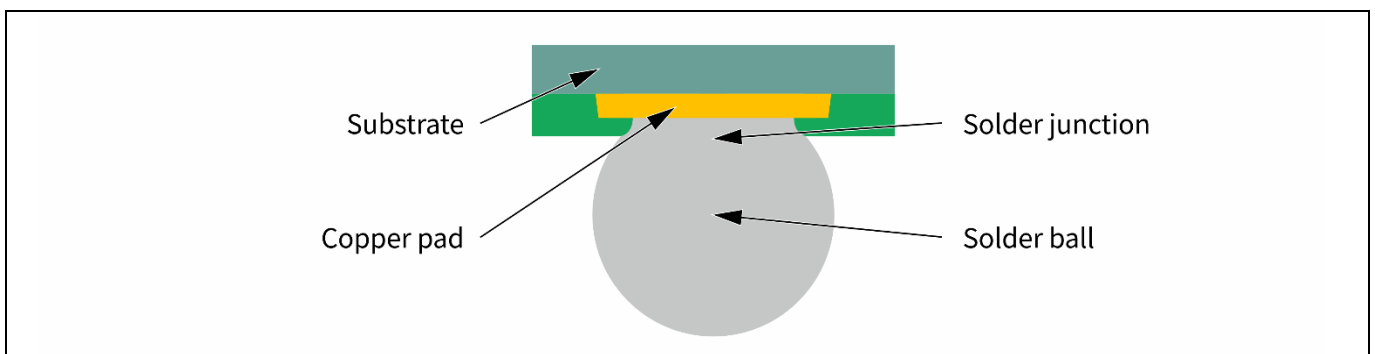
Schematic of a SMD ball pad on an optical sensor LFBGA package.
